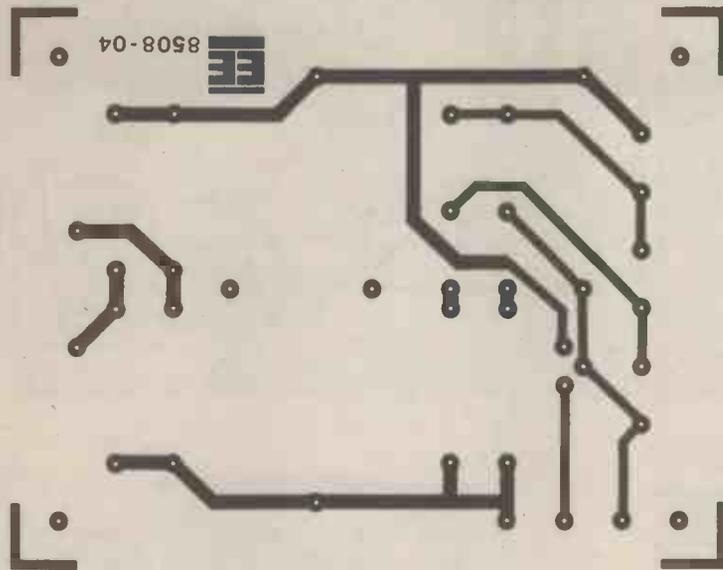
Printed circuit board (actual size) for the Drill Control Unit. This board is available from the *EE PCB Service*, quote order code: 8508-04.
